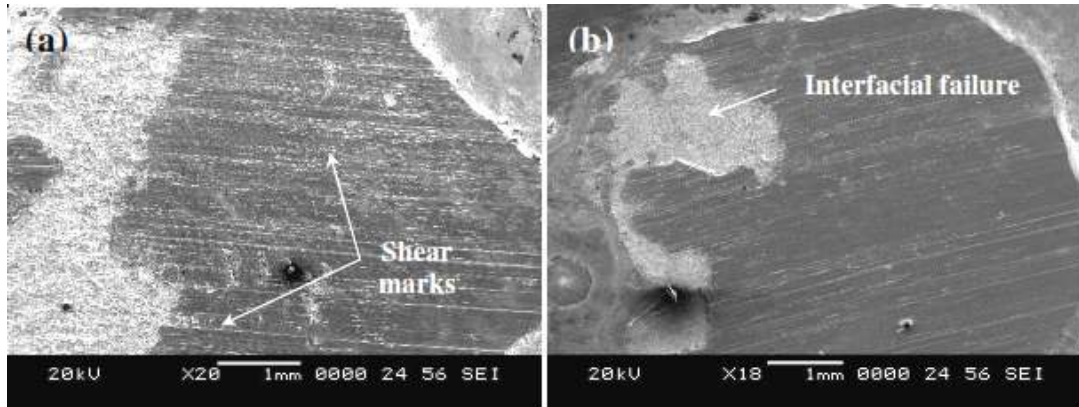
SEM micrographs of the fractured surfaces of (a) Sn-0.7Cu (b) Sn-0.3Ag-0.7Cu solder alloys on Ag coated Cu substrate surfaces
